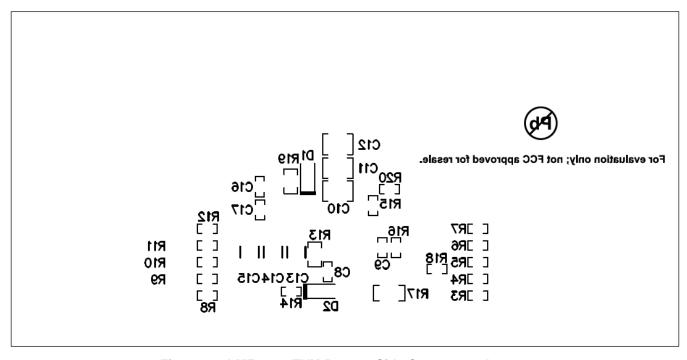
LMZ34202EVM Bottom-Side Component Layout
